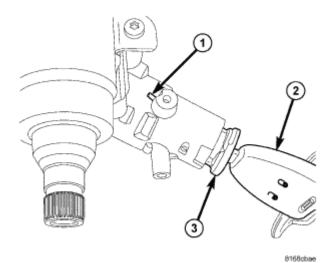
Access Hole For Lock Cylinder Removal Courtesy of CHRYSLER LLC
